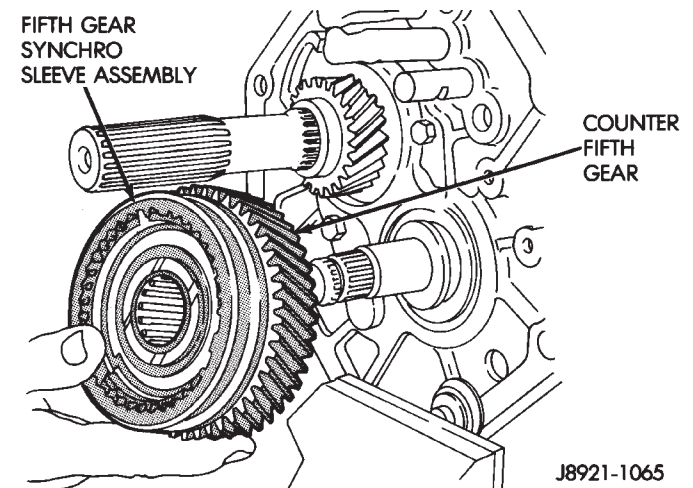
Removing Counter Fifth Gear And Synchro Assembly
